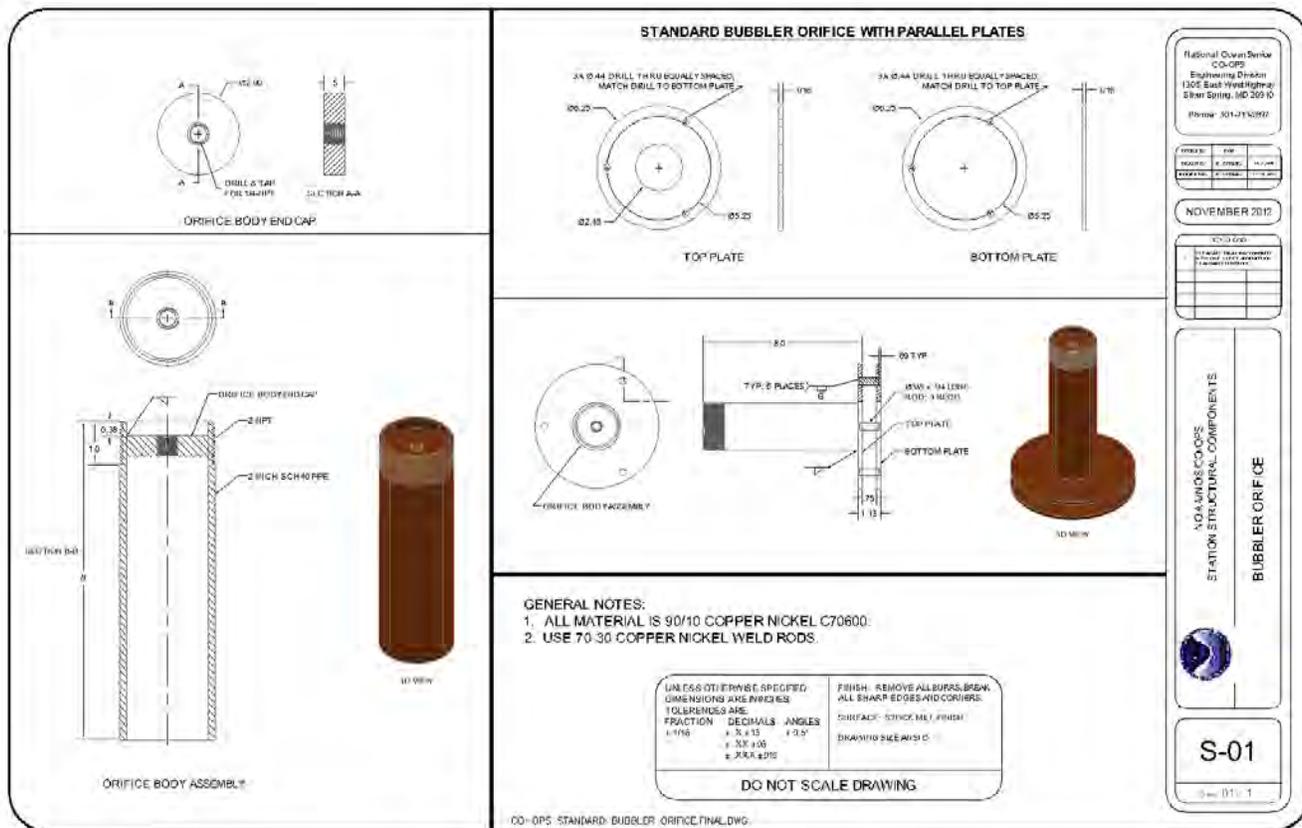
Bubbler Orifice with Parallel Plates Bottom Assembly
